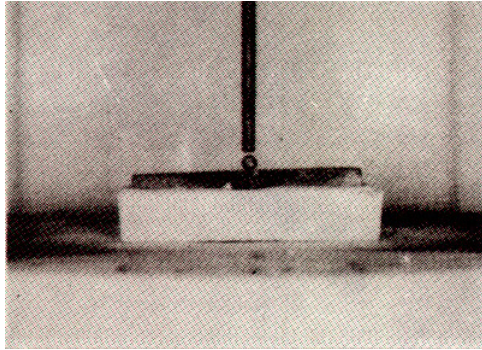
Soldering block placed under the alignment rod in its soldering position.
